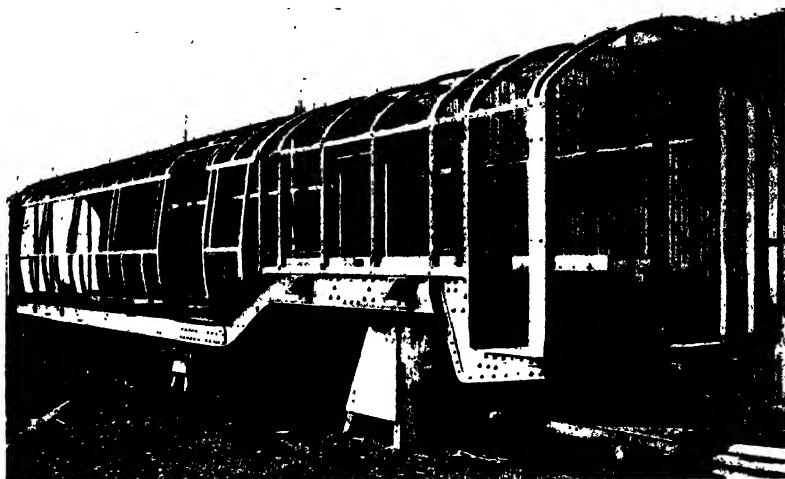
Centre-entrance Motor-car in course of construction at the Brush Electrical Engineering Co.'s Works. View from driving end. The raised floor of the control compartment should be noted. The floor of the driving compartment is on the same level as that of the passenger compartment.
